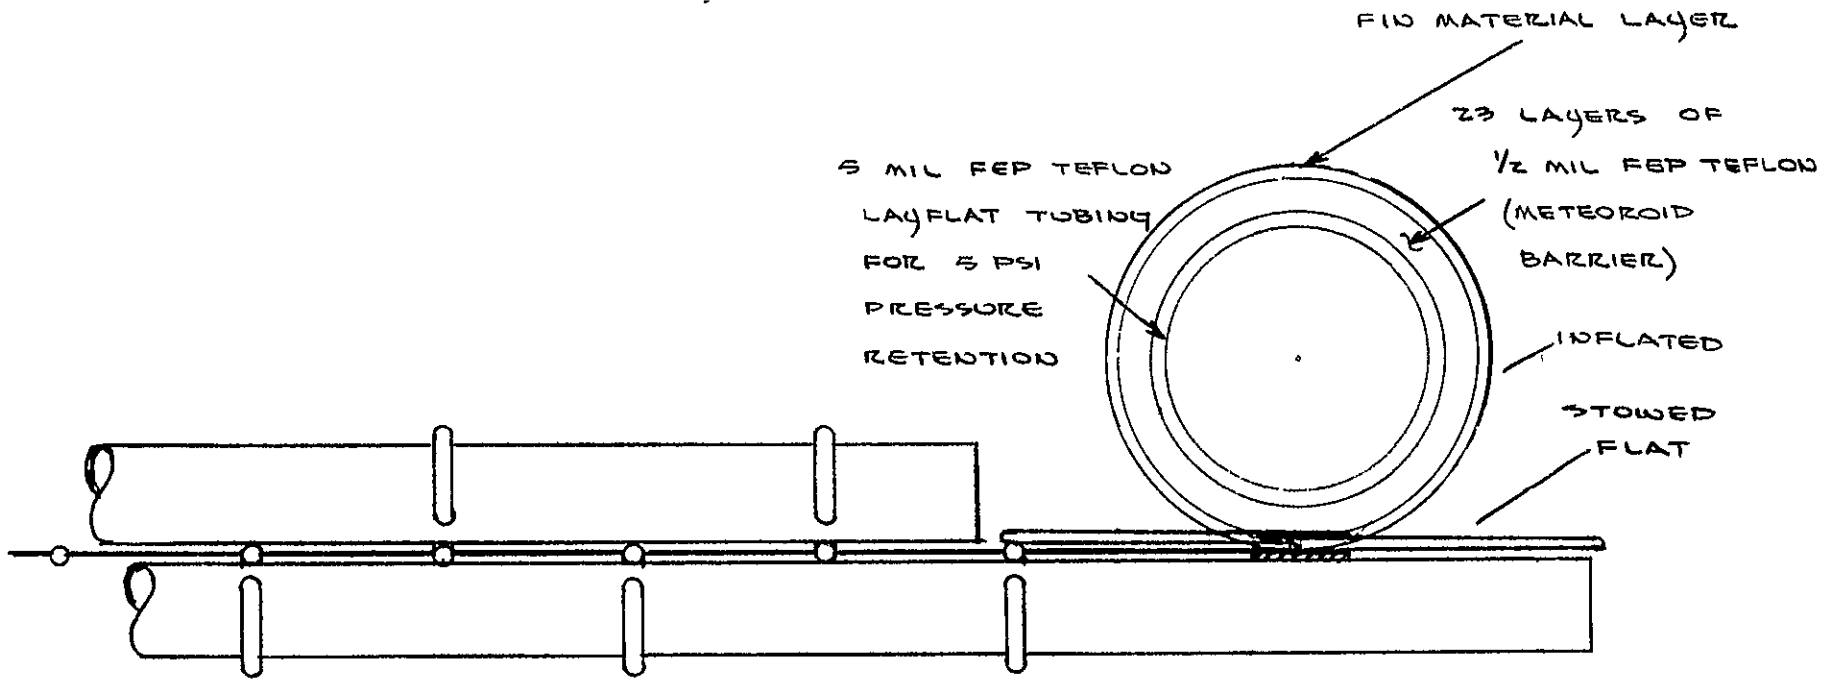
DEPLOYMENT GAS TUBING DETAIL
